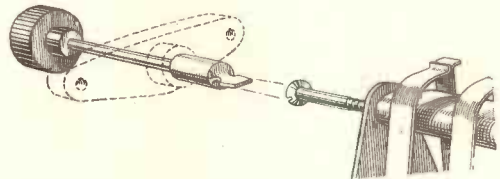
SWITCH HANDLE AND CONNECTOR.
